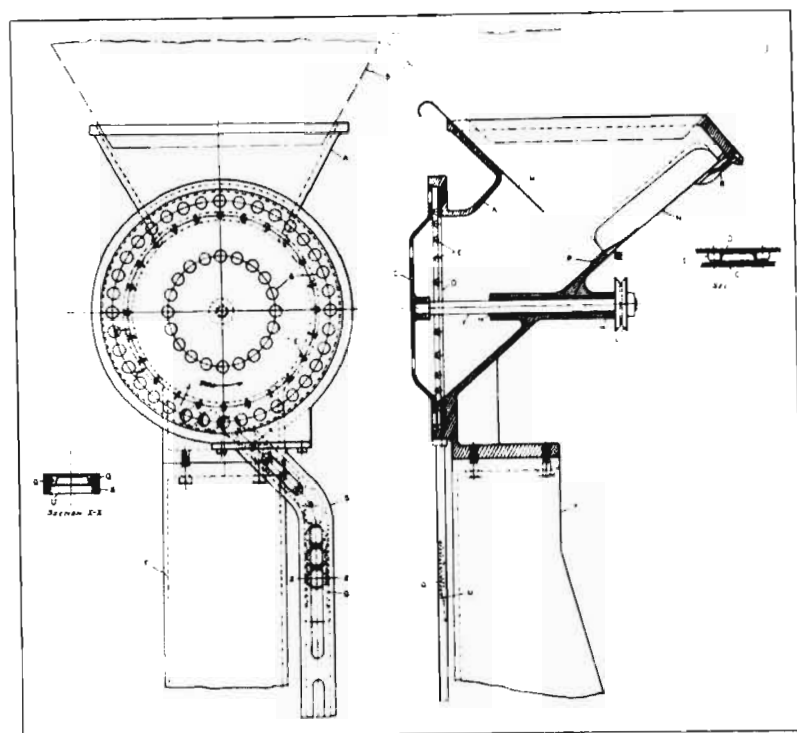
Hopper feed designed to deliver bottle caps to machine, all with the same side up.
